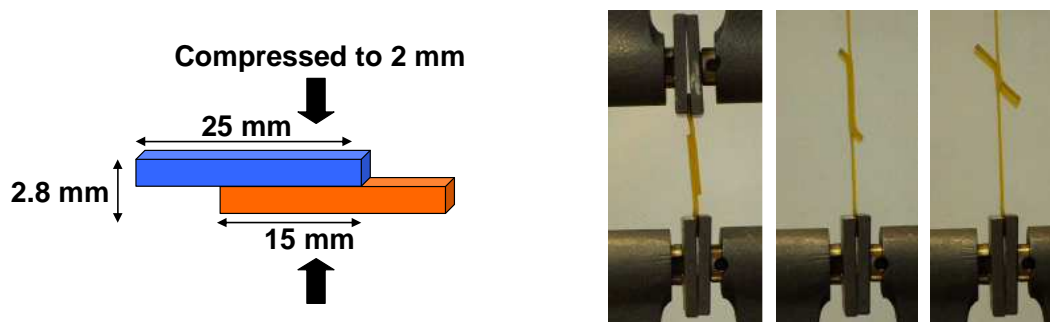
Lap-shear test geometry. (a) Assembly of the two rectangular samples, compressed together during the welding process. (b) The assembly is then separated using a tensile machine: pictures are taken at different steps of the lap-shear test for an assembly welded at 150°C for 1 hour. The samples contain 5 mol% of $\text{Zn}(\text{OAc})_2$.
